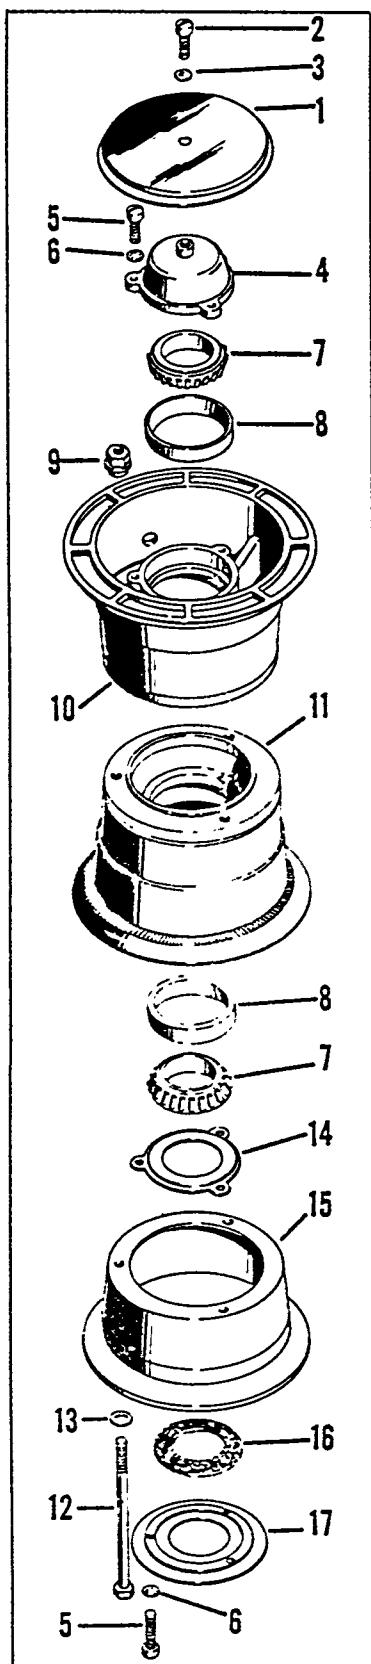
WHEEL ASSEMBLY CHART
